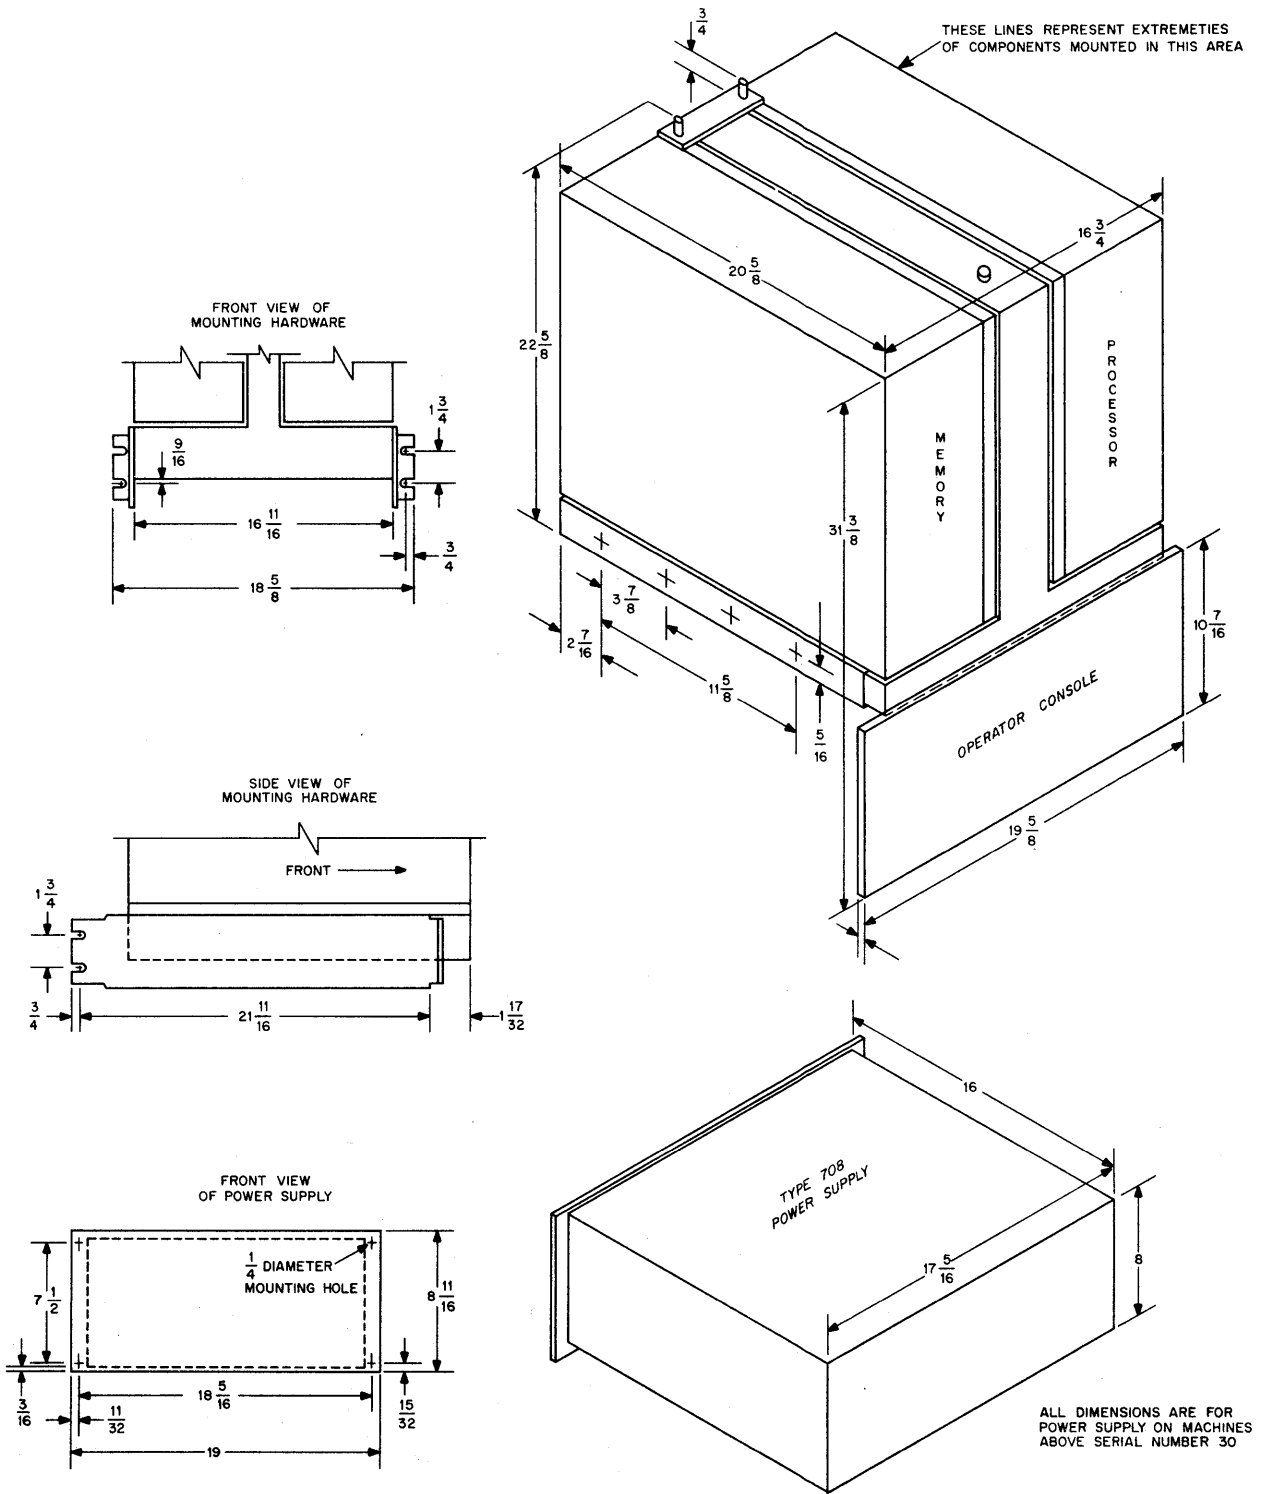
Cabinet-Mounted PDP-8 Installation Dimensions
